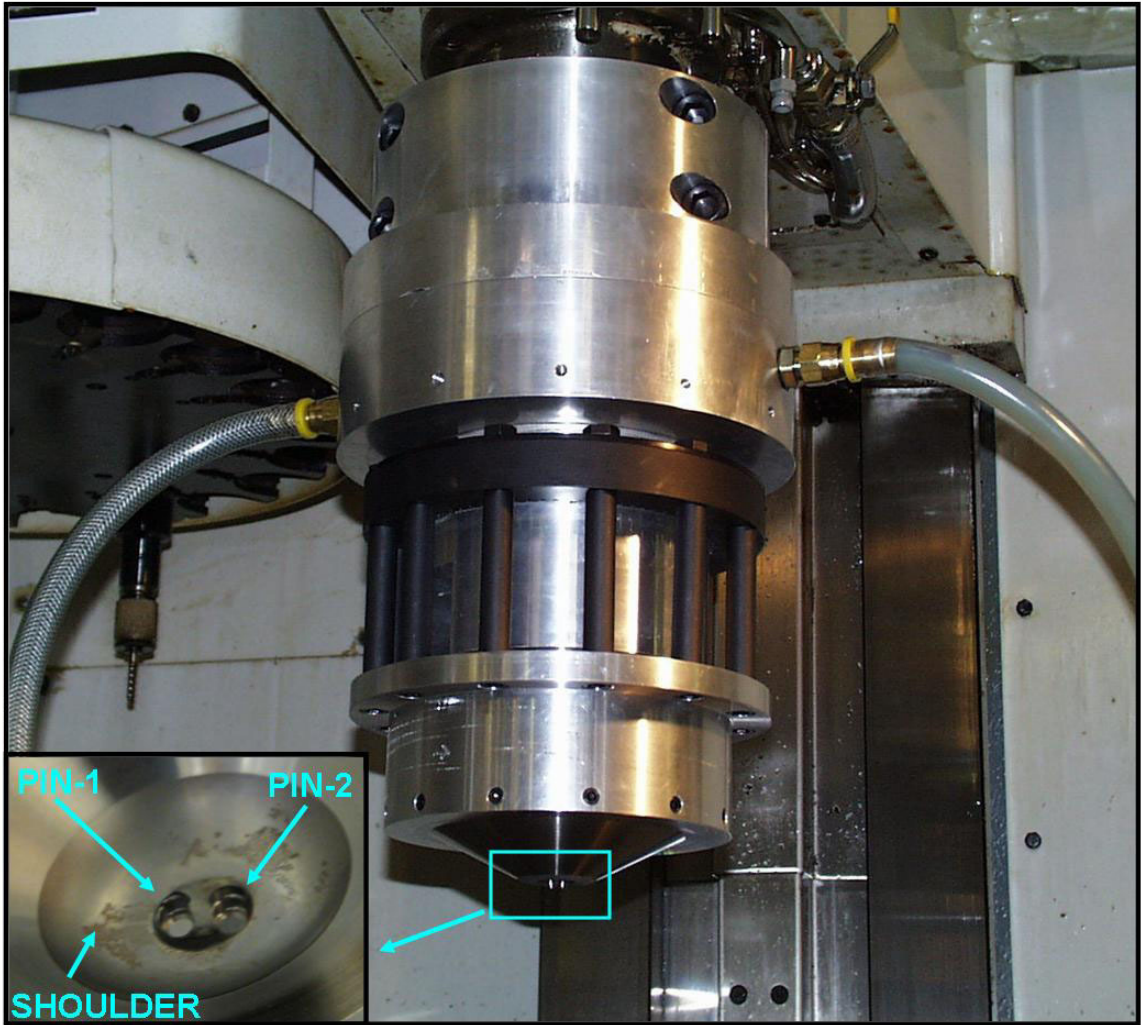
The Friction driven stitch welding apparatus. (Inset) the pins and shoulder are shown.
